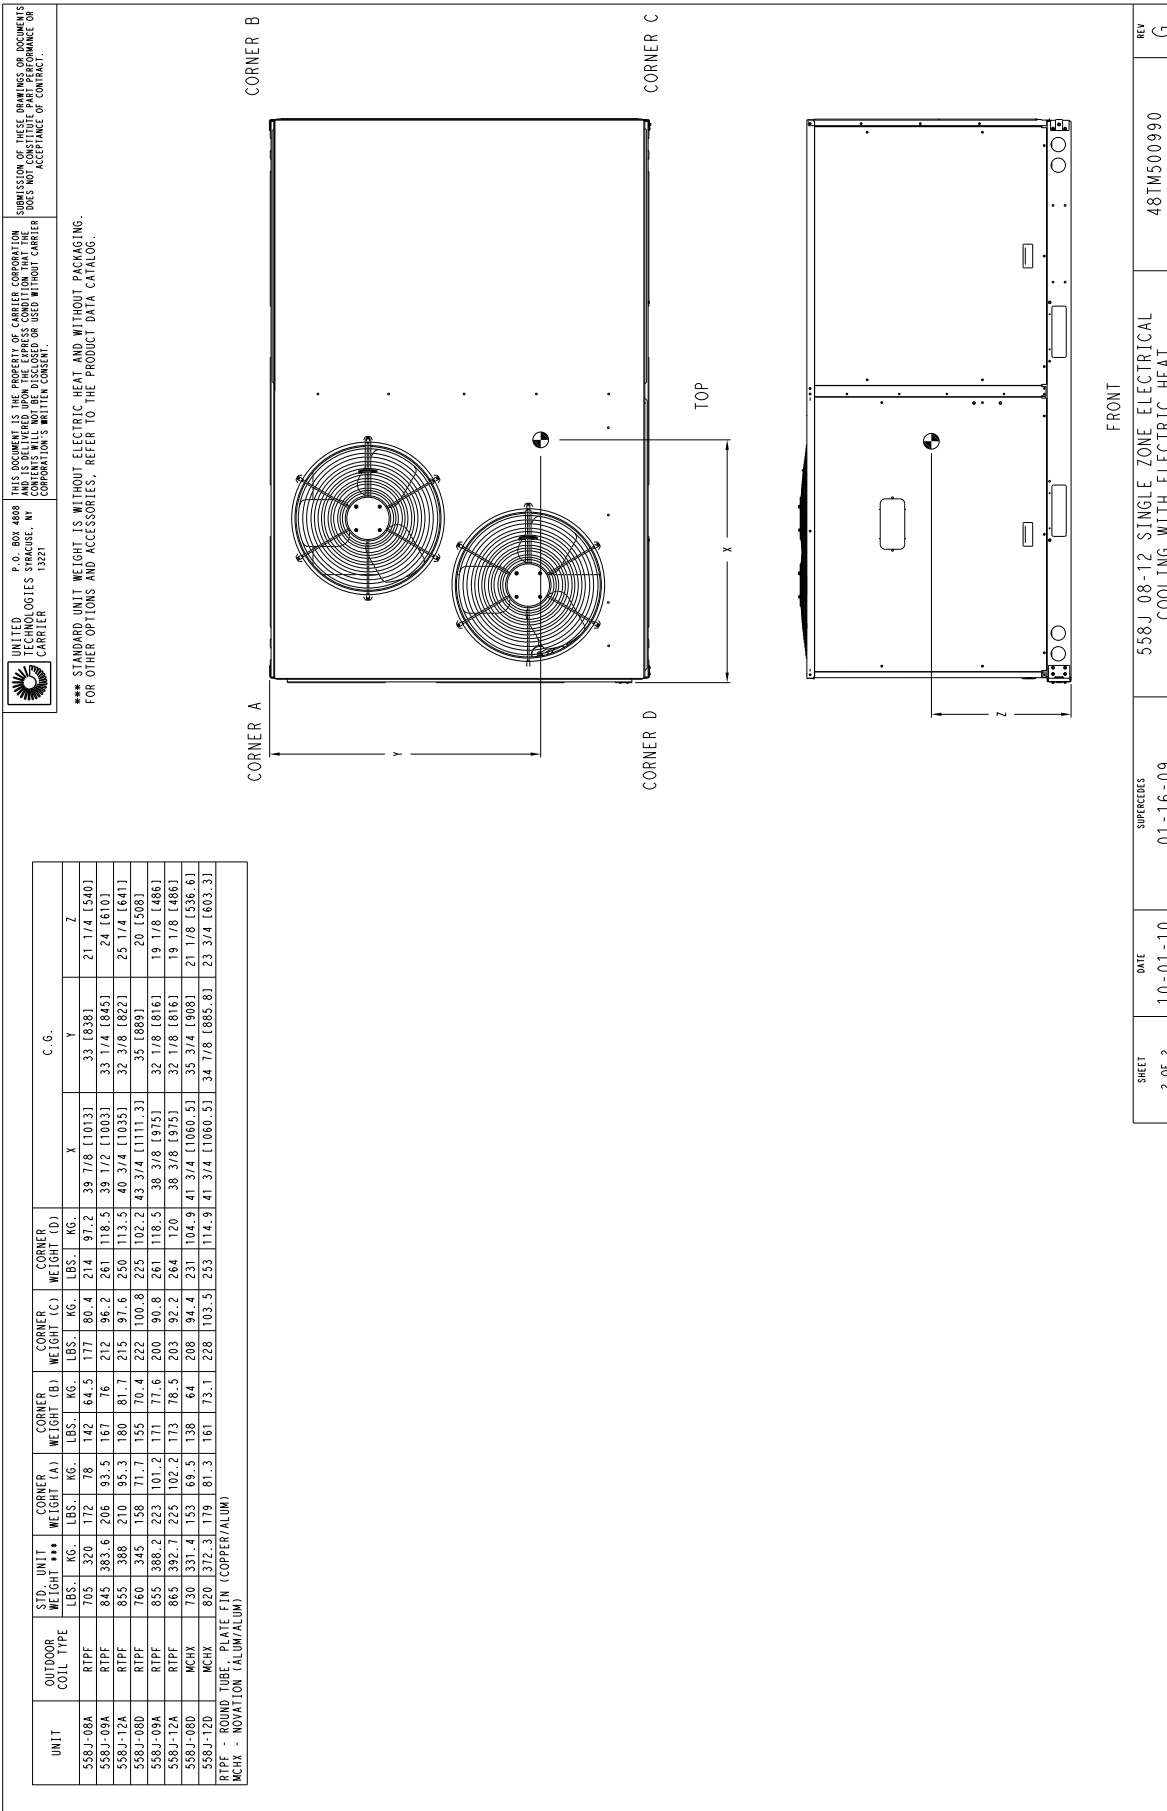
Dimensions 558J 08-12 (Sheet 2 of 2)
